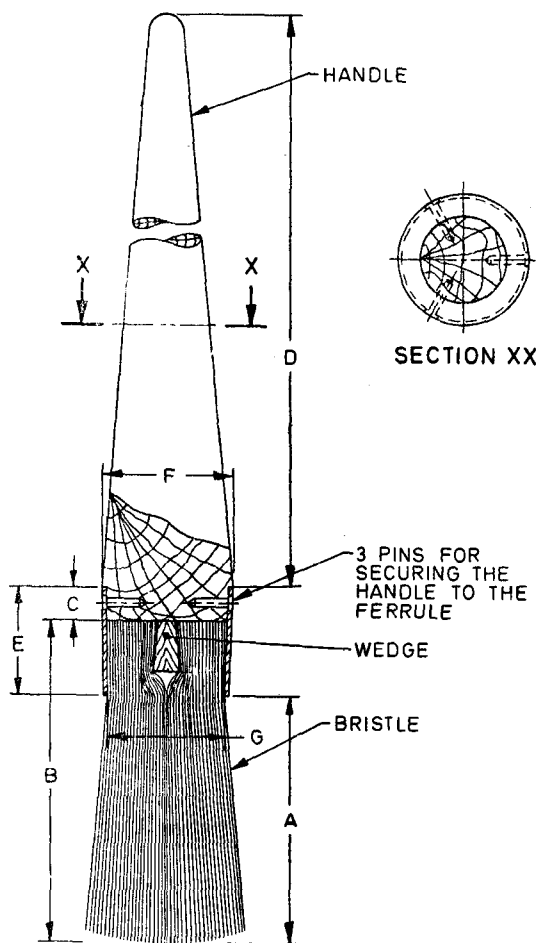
SHAPE AND DESIGN OF BRUSHES, SASH TOOL
